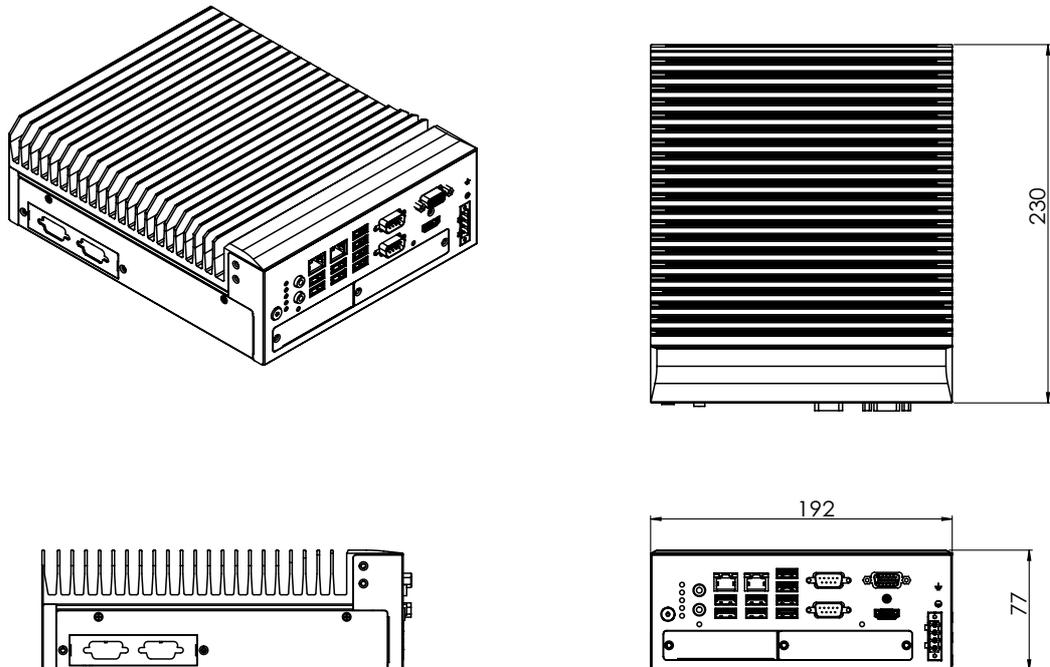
MIC-770 Mechanical Dimension Drawing
